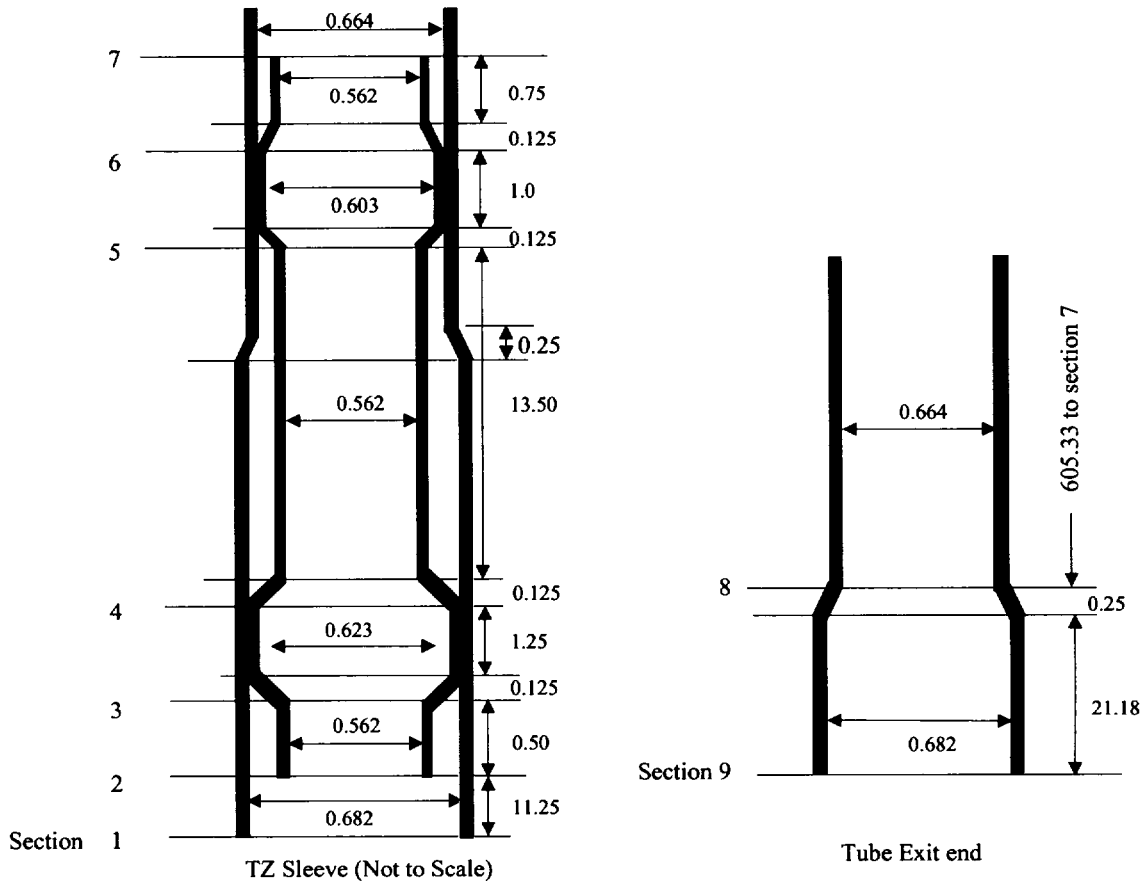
Dimensions of Tube Support Sleeve (Sleeve is 9 inch long)
